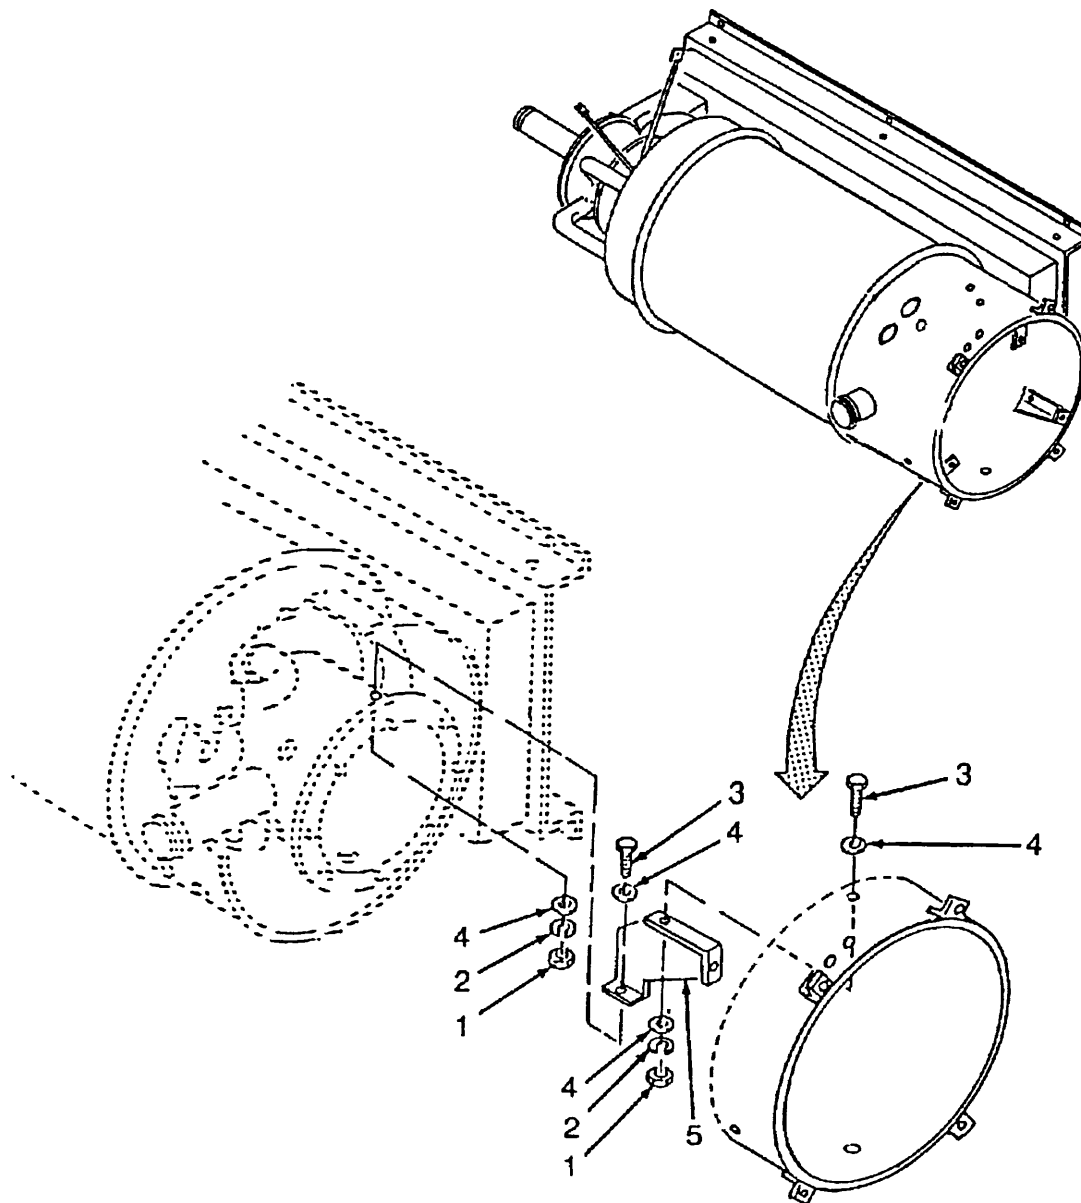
Heat Exchanger, (Model H120-1) Disassembly
